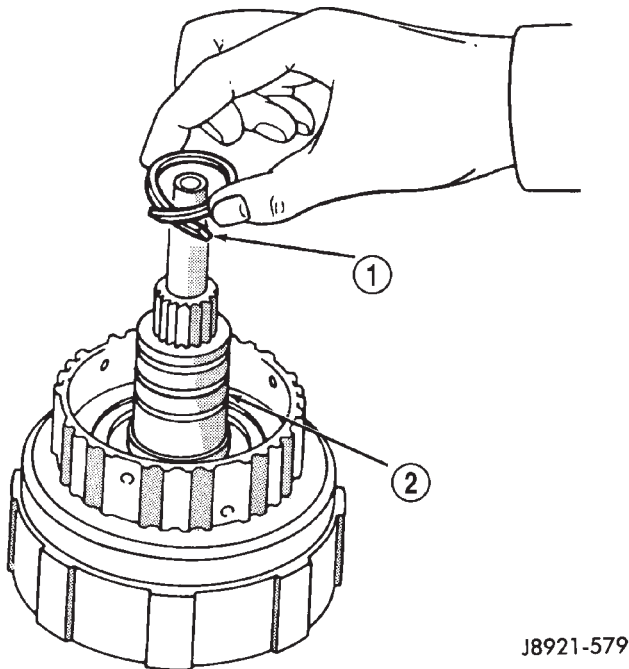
Installing Clutch Drum Shaft Seal Rings
